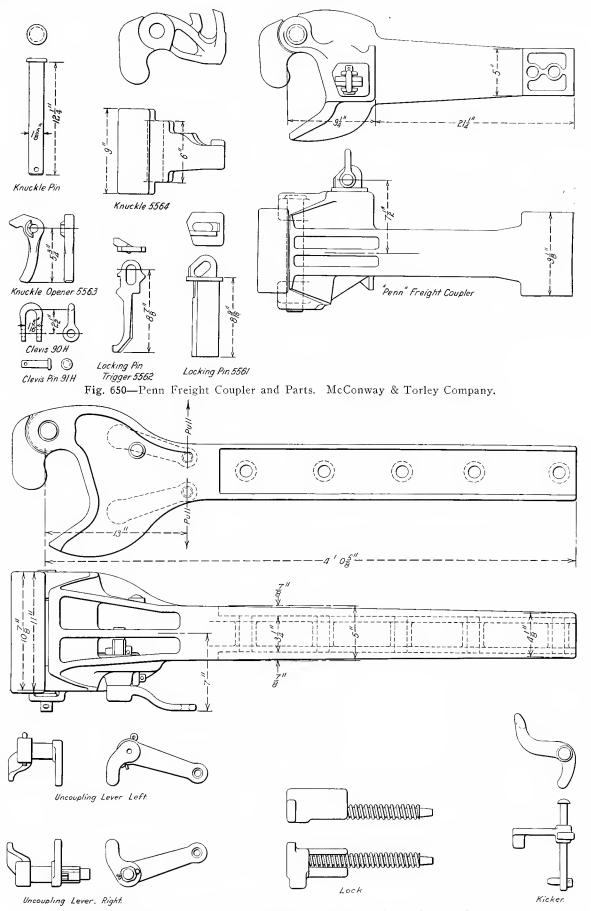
Double Bottom Operated Passenger Coupler. Gould Coupler Company.
